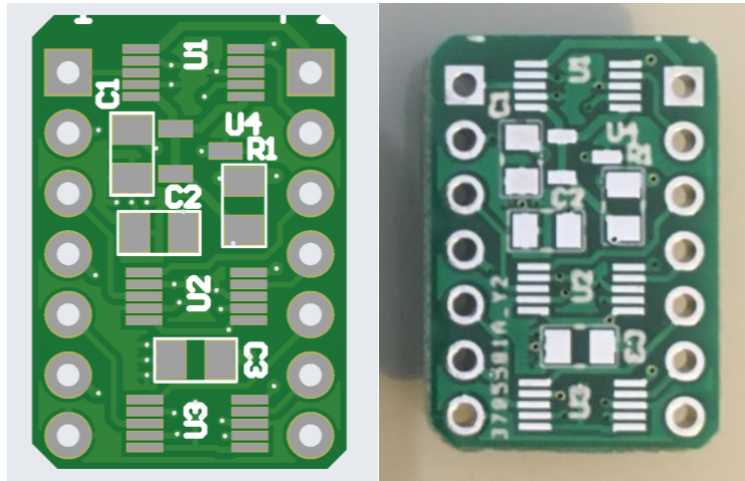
INA2181 breakout board (top-view). Left: PCB layout. Right: Manufactured PCB without soldered components.
